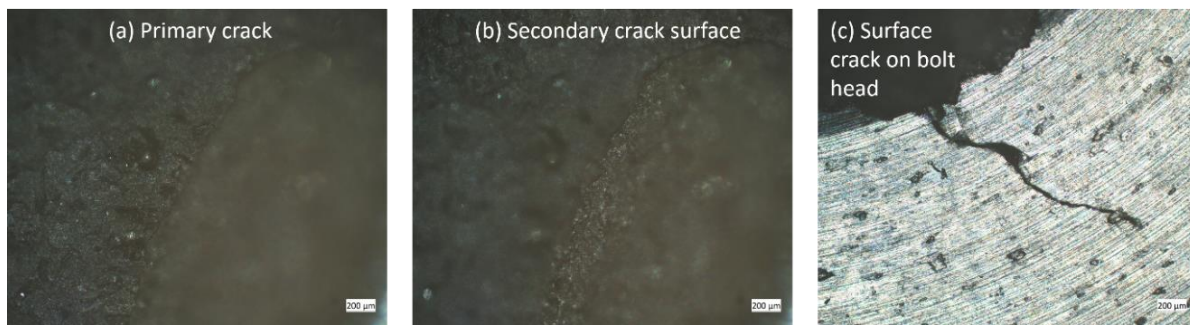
Fracture of S2.5 sample specimen with machining-induced crack showing (a) primary crack; (b) secondary crack; and (c) propagated cracked bolt head surface.
